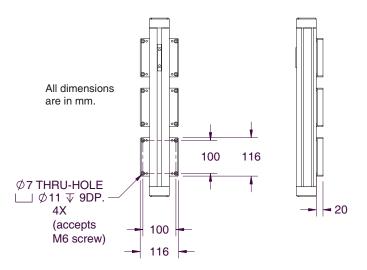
LG6 Module with Mounting Feet Dimensions
